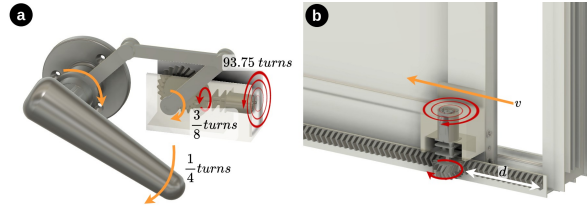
(a) transferring twist motion of a door handle to the rotor of the generator using a three-bar linkage attachment, (b) transforming linear motion of a sliding window into rotor movement using a rack-gear attachment.
